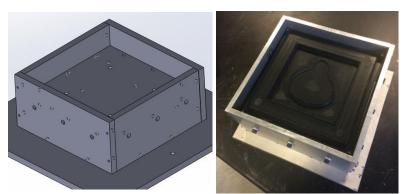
Fixture used for securing the pattern for holes in the base plate in which machining and ultrasonic welding
